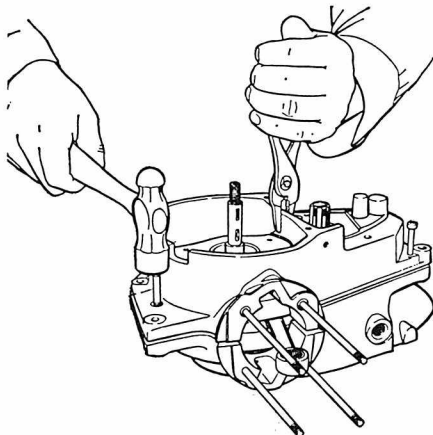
The crankcase halves can be separated as shown by using two long screws.
